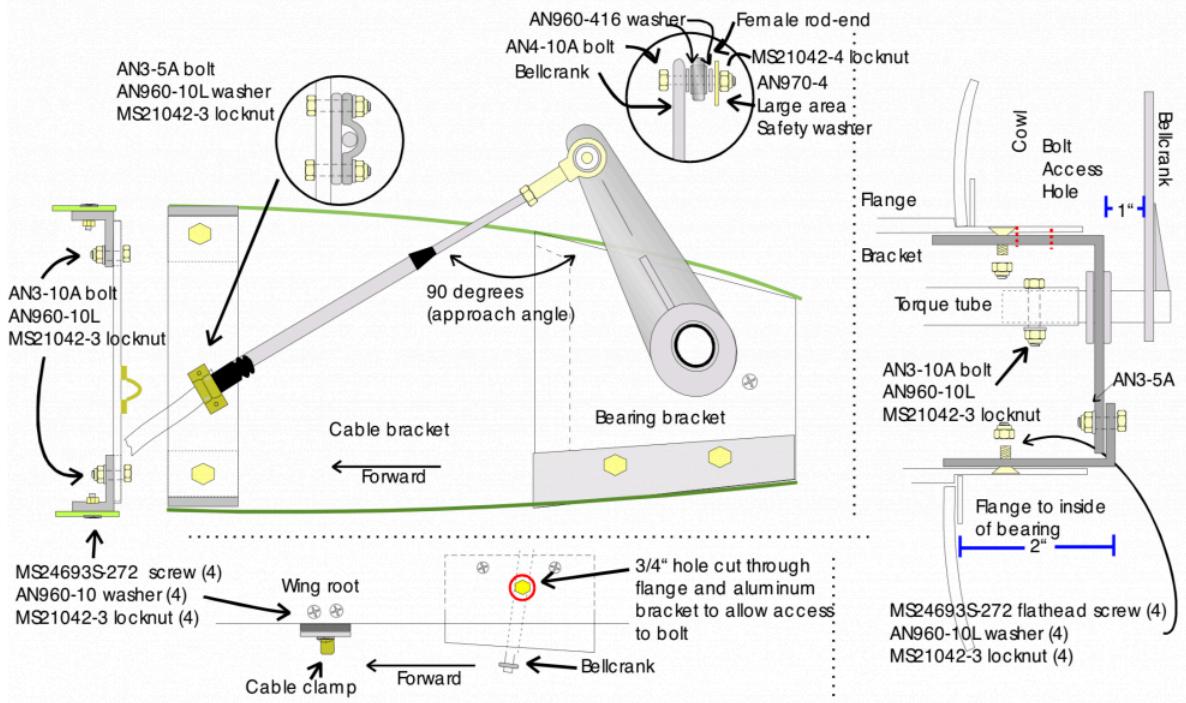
Wing Root Aileron Cable Bracket Assembly
